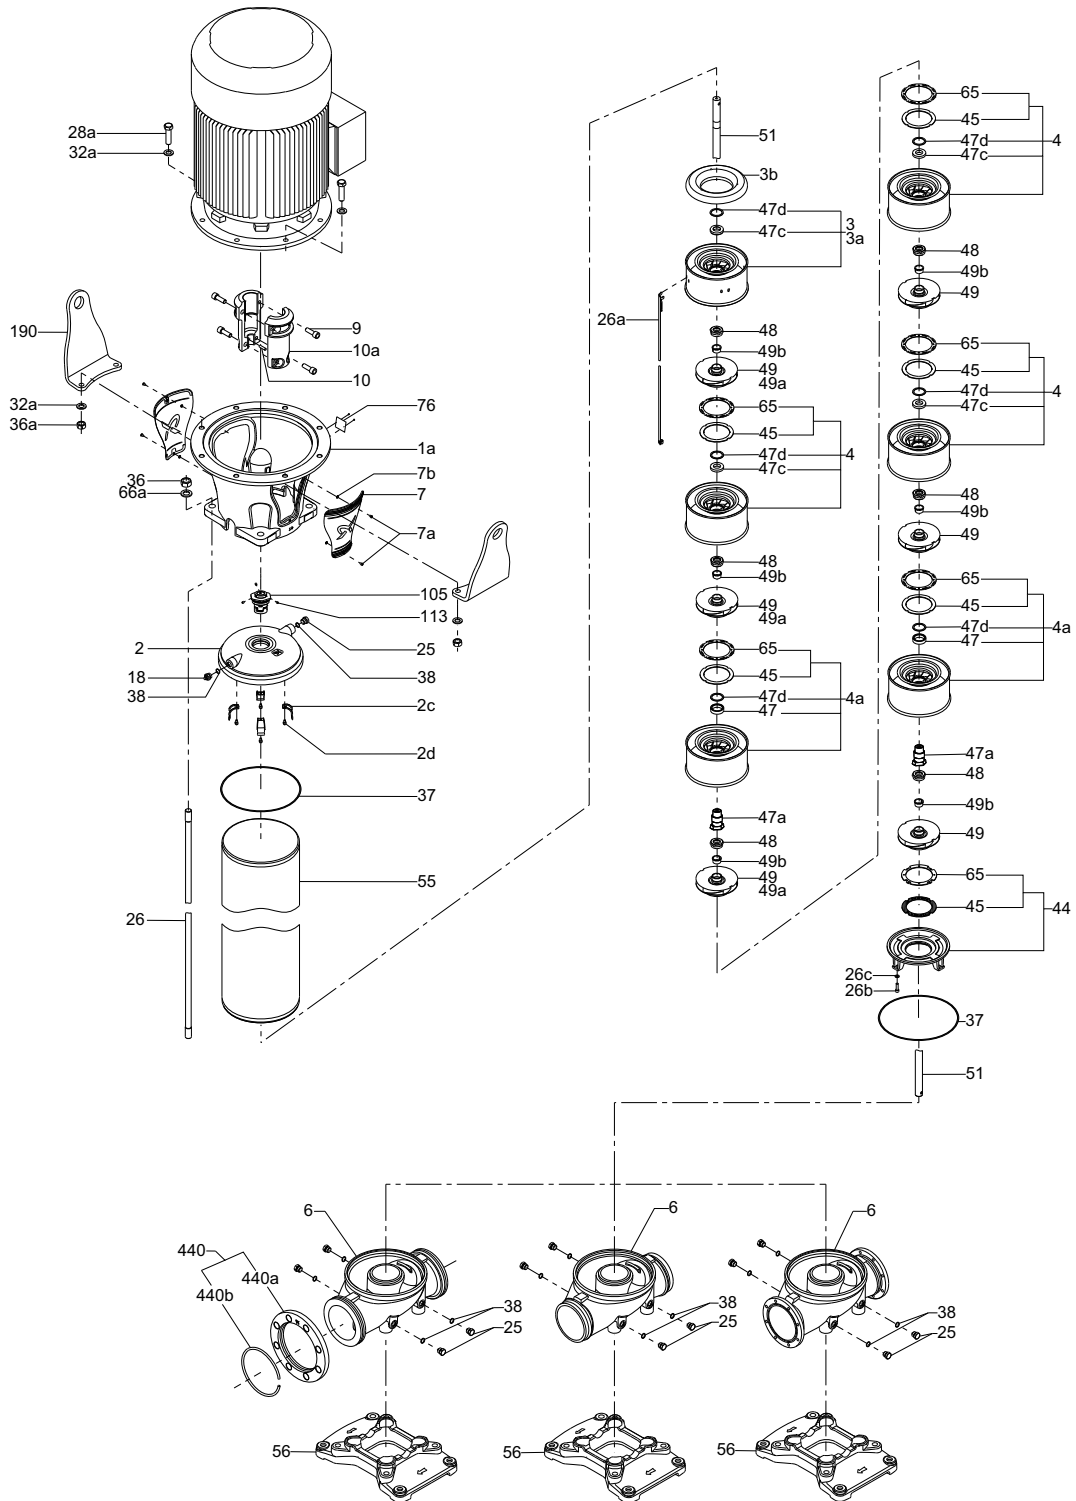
Exploded view of CR, CRN pump with Ø22 shaft and without thrust-handling device
